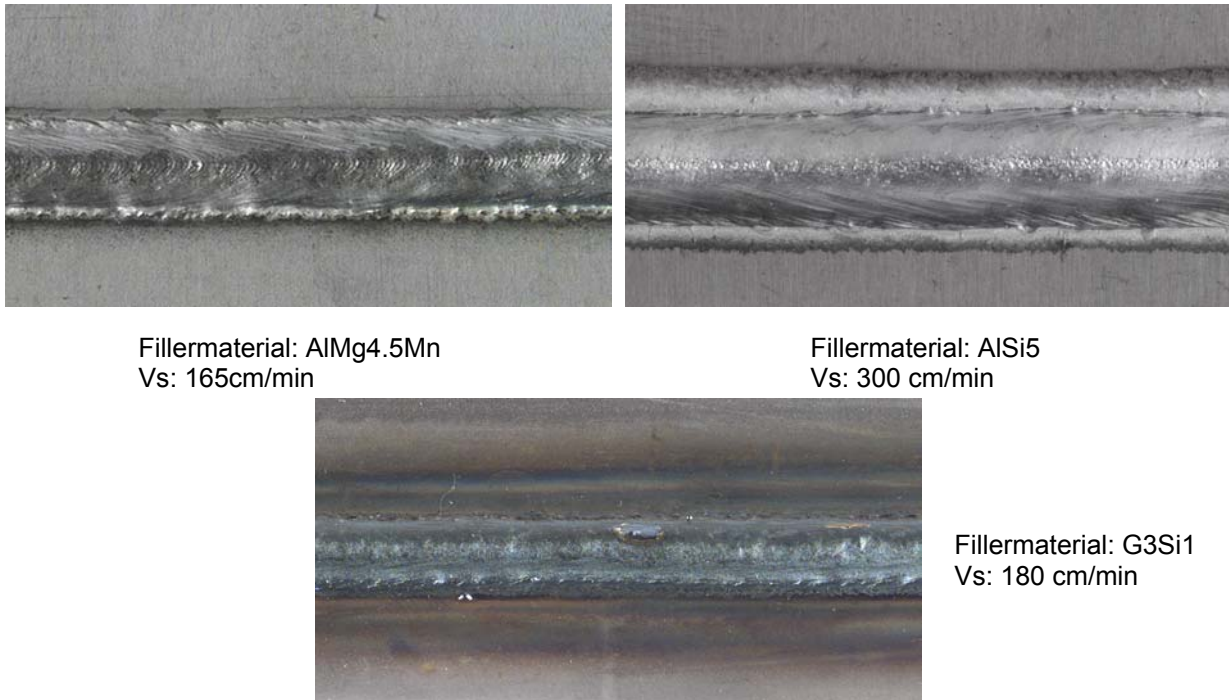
Maximum wire feed speed for overlap seams of 3 mm sheets with different filler materials.
